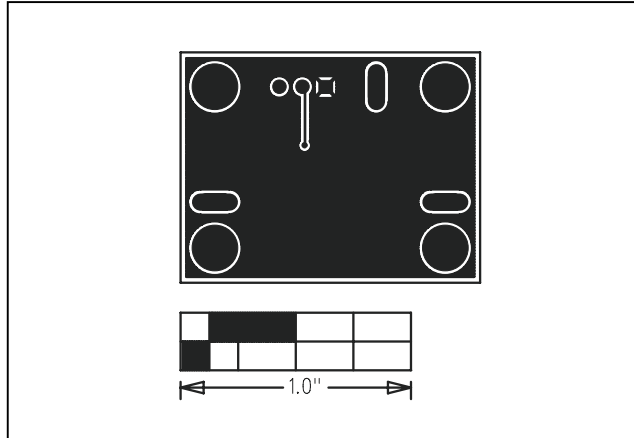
MAX8640 EV Kit PCB Layout—Solder Side
